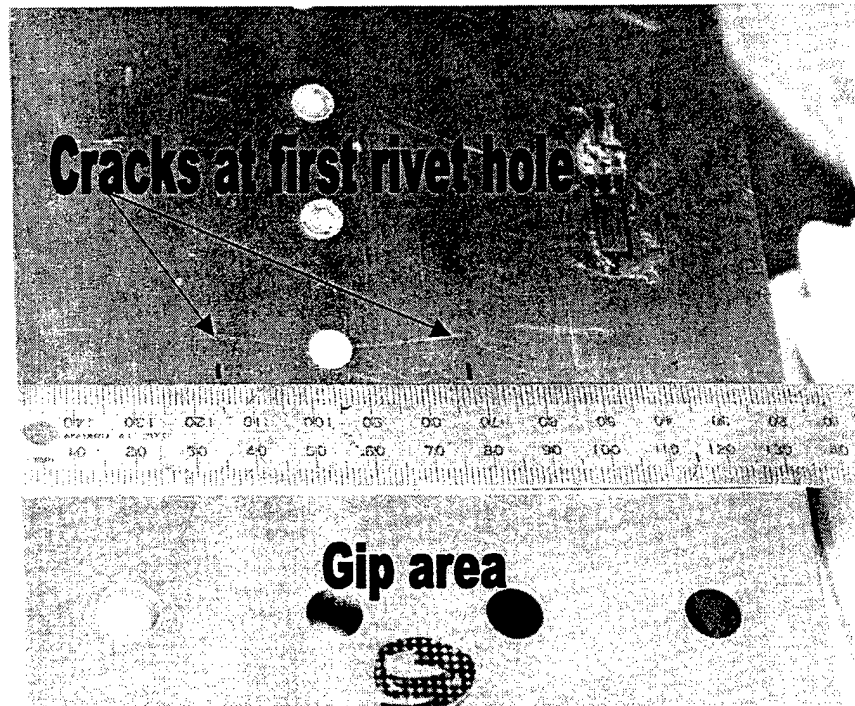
Photograph of a 40mm long crack forming from the first rivet hole in a thin skinned specimen with an unbroken stiffener and a 20mm saw cut in the skin
